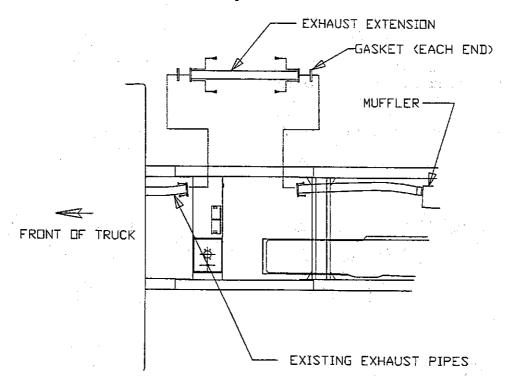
EXHAUST EXTENSION INSTALLATION
